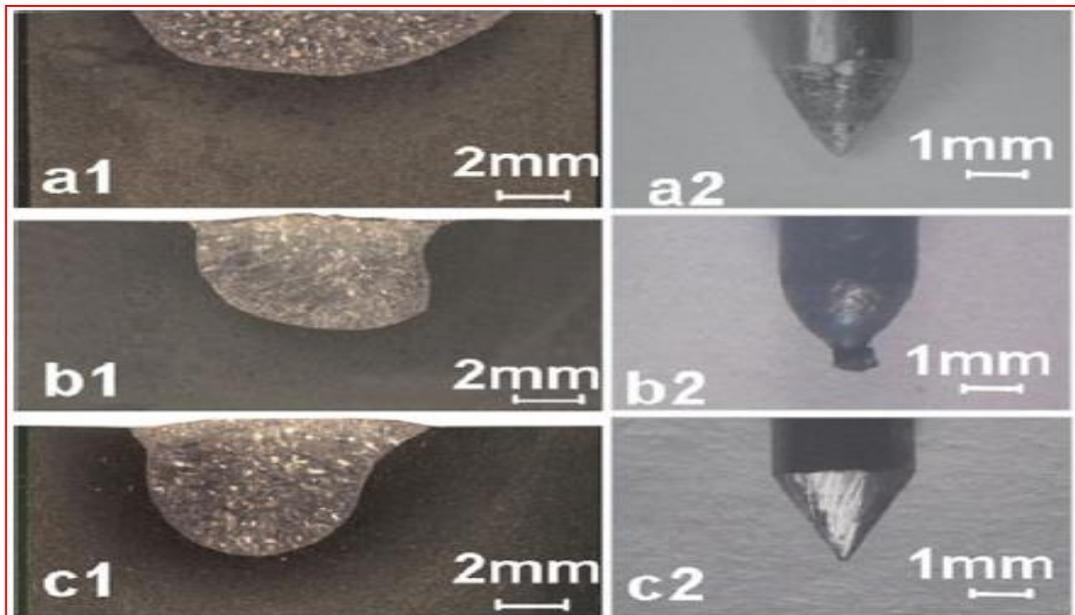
Weld pool shapes and electrode morphology under different welding conditions: a Traditional TIG (pure He, 10 L/ min); b traditional TIG (He-5%O₂, 10 L/min); c double shield TIG (inner: pure He, 10 L/min; outer: He-10%O₂, 10 L/ min) [83]
